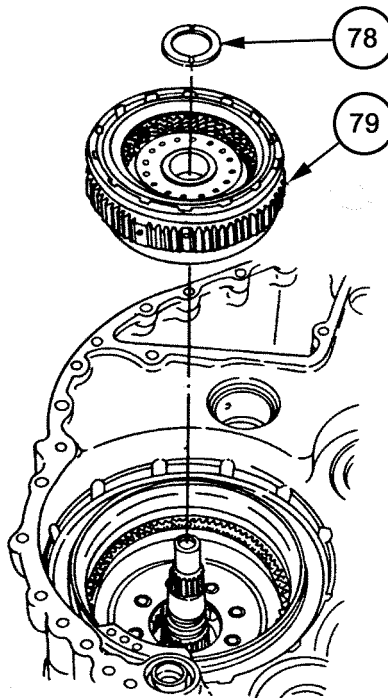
Fourth and Reverse Clutch Assembly. (Repeated)
